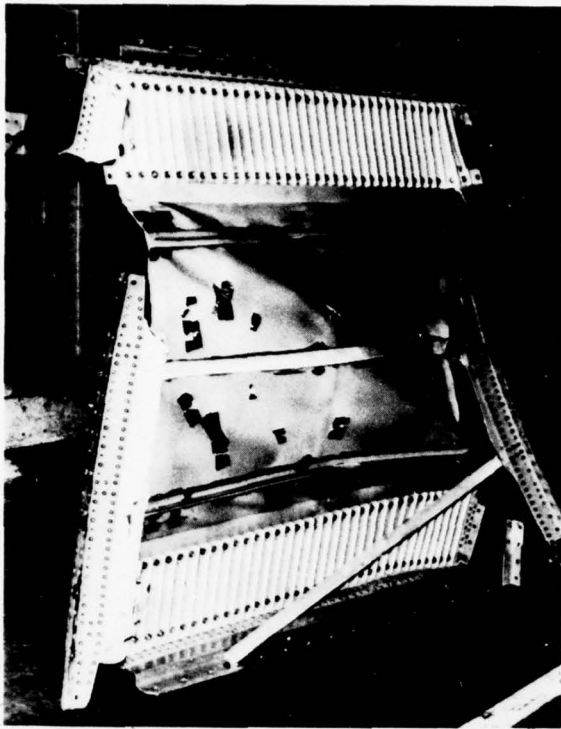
SHEAR AND TENSION FAILURE - FRONT VIEW
